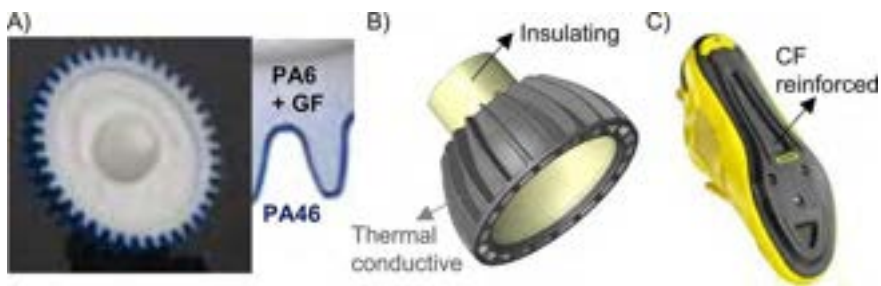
Examples of applications using overmolding. (A) Gear with low friction surface; (B) LED bulb housing combining insulating and thermal conductive materials; (C) cycling shoe with carbon fiber-reinforced sole overmolded with impact resistant material.
